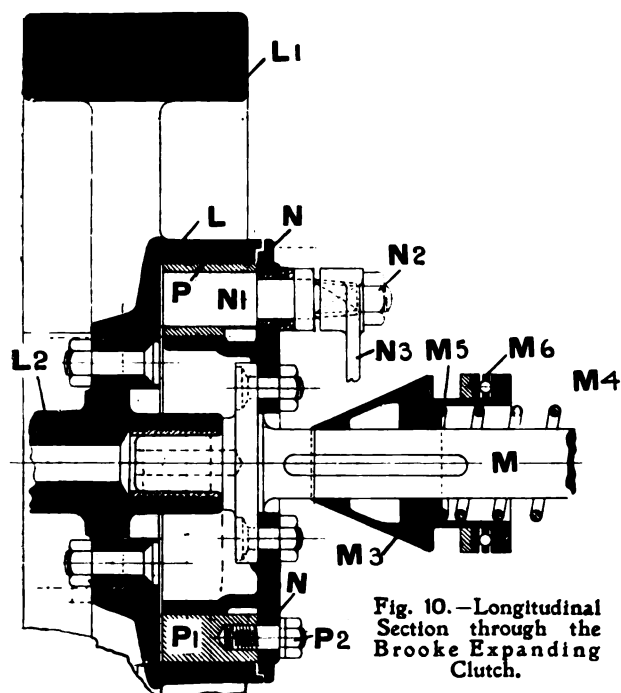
Longitudinal Section through the Brooke Expanding Clutch.
